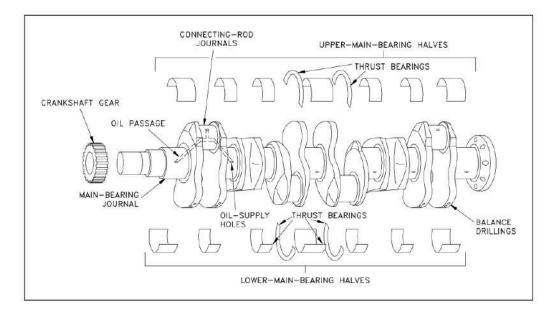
Diesel Engine Crankshaft and Bearings Source: (Gedeon, 2019)
